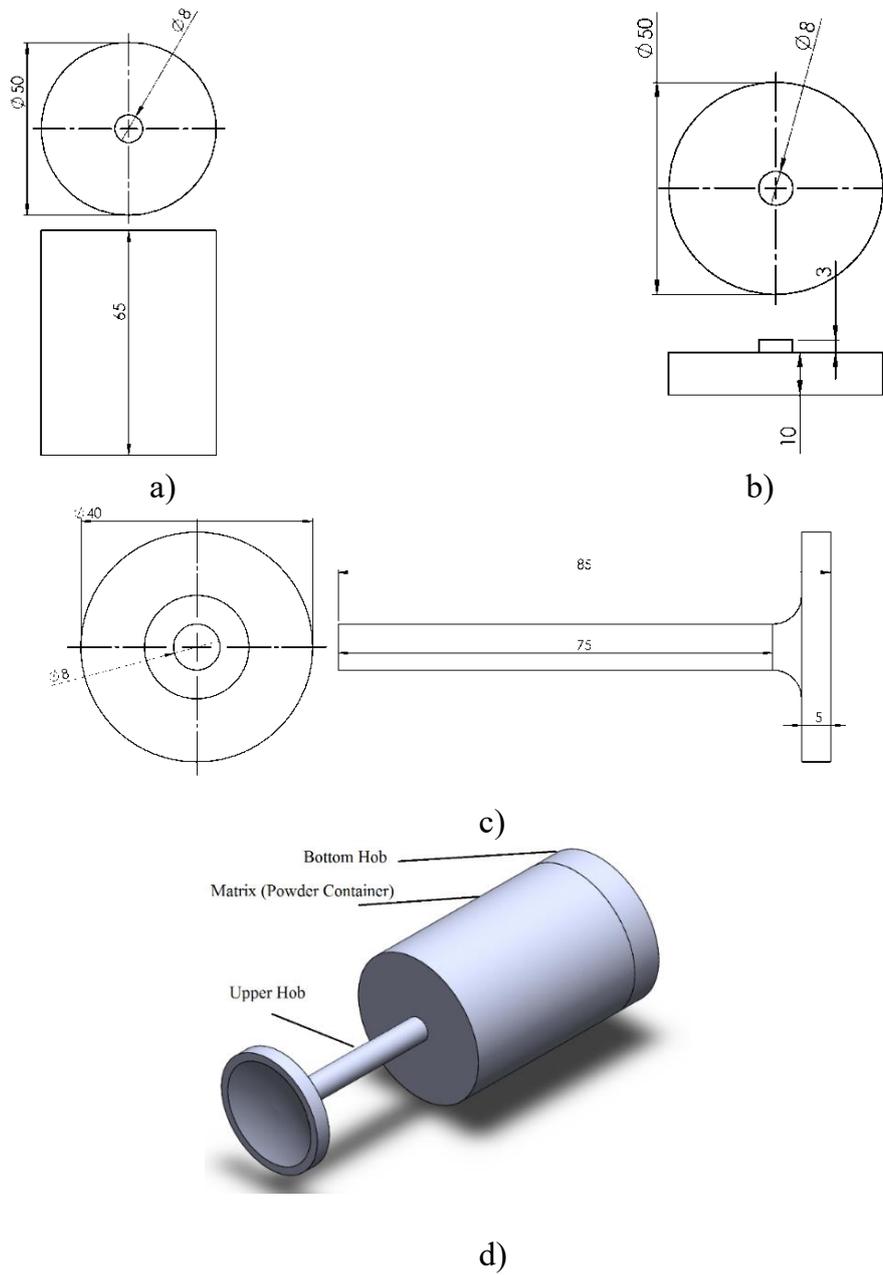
Schematic of the mold, a) Powder container (matrix), b) Bottom hob (fixed hob), c) Upper hob (pressing hub) and d) 3D view of the mold
